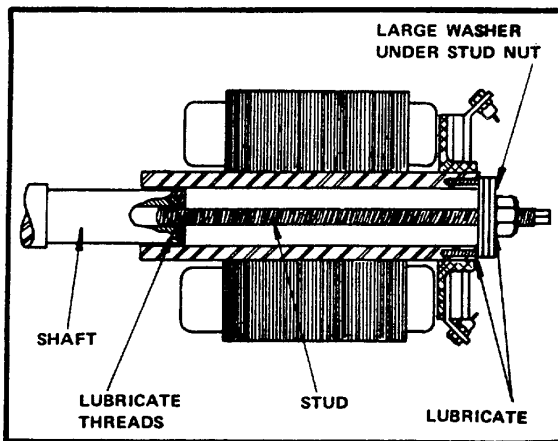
Installing Exciter Armature and Rotating Rectifier Assembly
